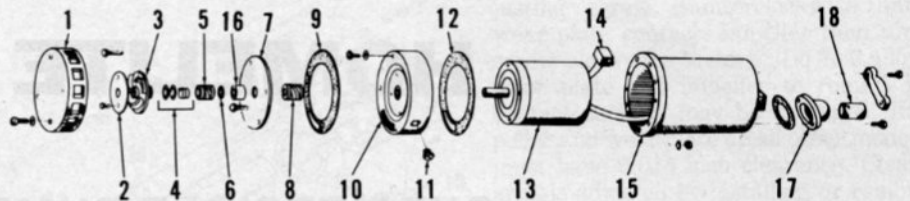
Exploded view of SP2 series submersible pumps.
